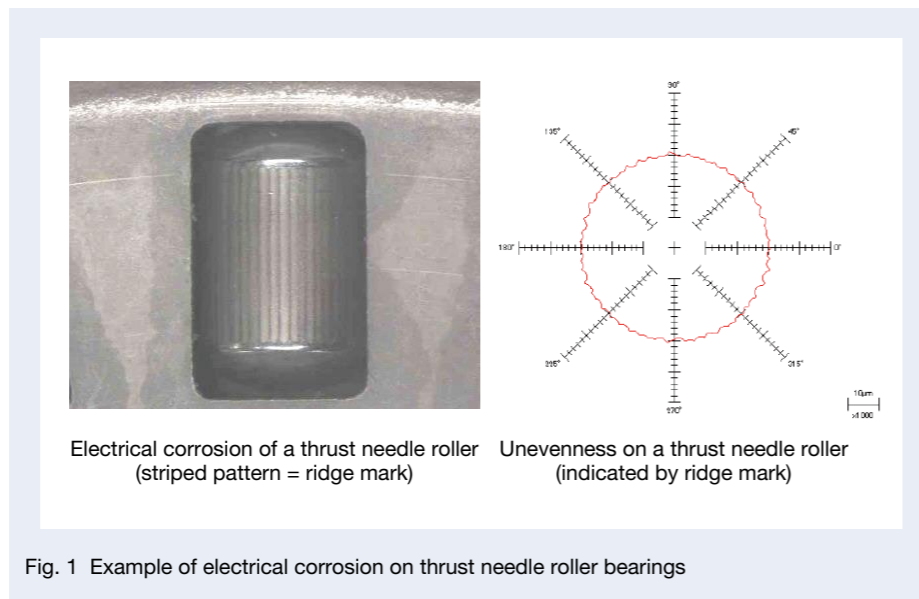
Example of electrical corrosion on thrust needle roller bearings
